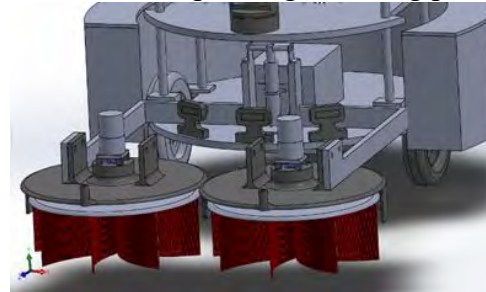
Assembly of a module with rotary brushes lowered, mounted to the lifting mechanism
